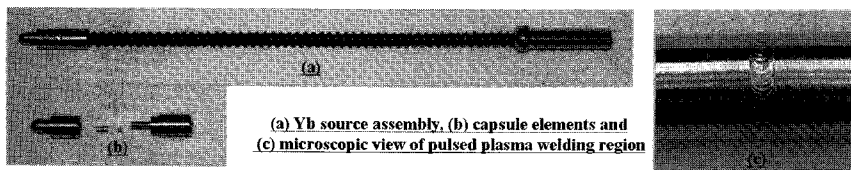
Photographies of ^{169}Yb source assembly and its components
